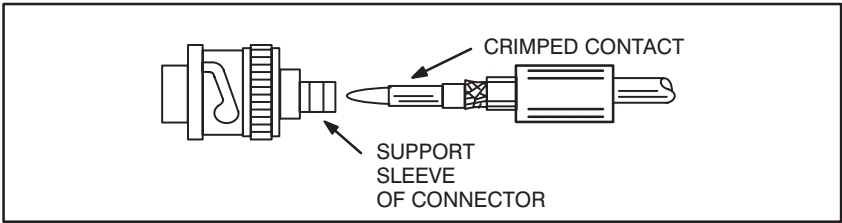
Connector Installation Step 9 for RG-11/U Cable
